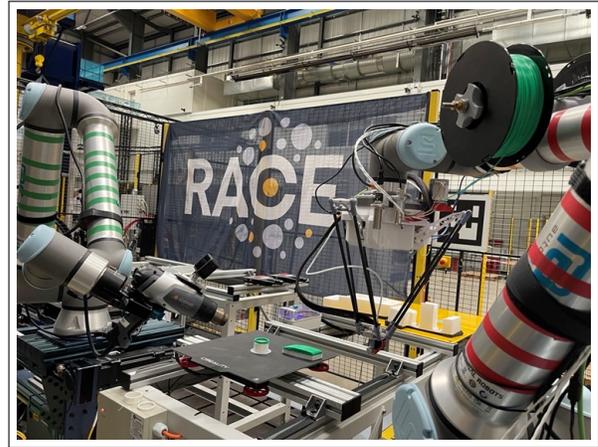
AIM-TU platform: 6-DOF robot (green marking) holding a heat gun and a vision camera. 6-DOF Robot (red marking) with a 3-DOF robot holding an extruder.
